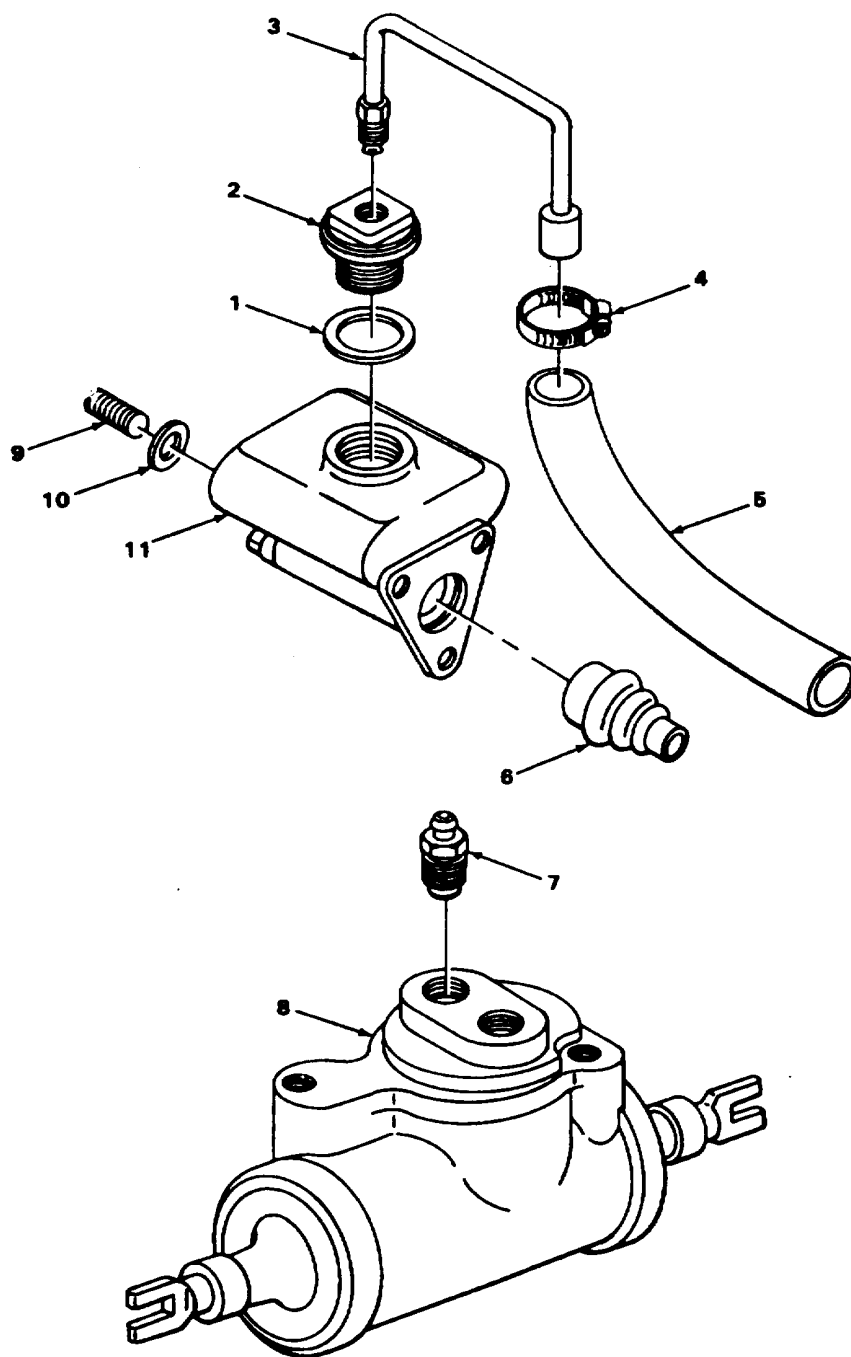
HYDRAULIC MASTER CYLINDER AND WHEEL CYLINDER.
